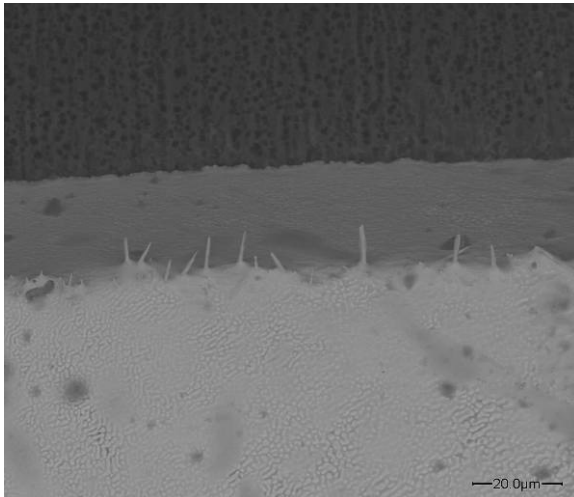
Example of soldering icicles produced during hand soldering of Sn-3.0Ag-0.5Cu solder, when iron was removed too slowly
